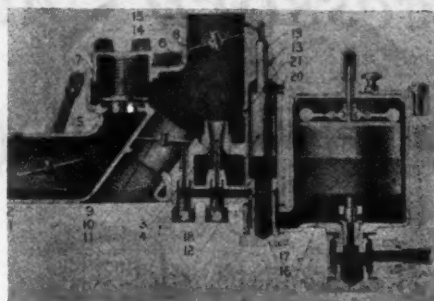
A cross-section of the Ball and Ball carburetor used on the 1918 Oldsmobile
